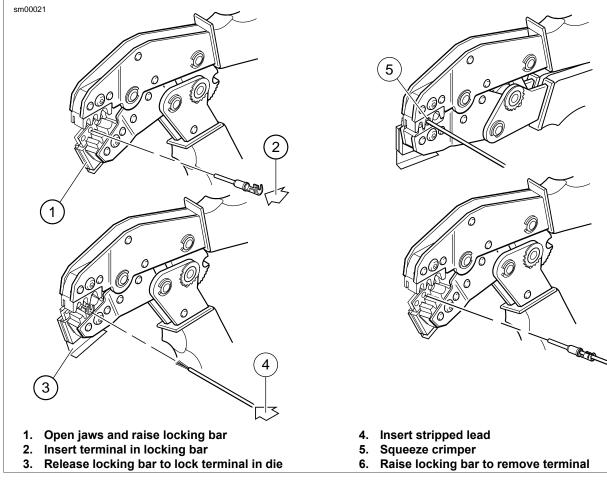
Crimping a Deutsch DT Sealed Terminal
